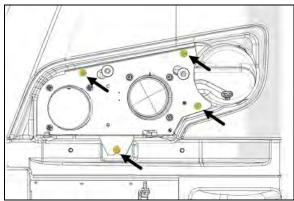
4 SCREWS HOLDING THE HEADLIGHT MODULE
